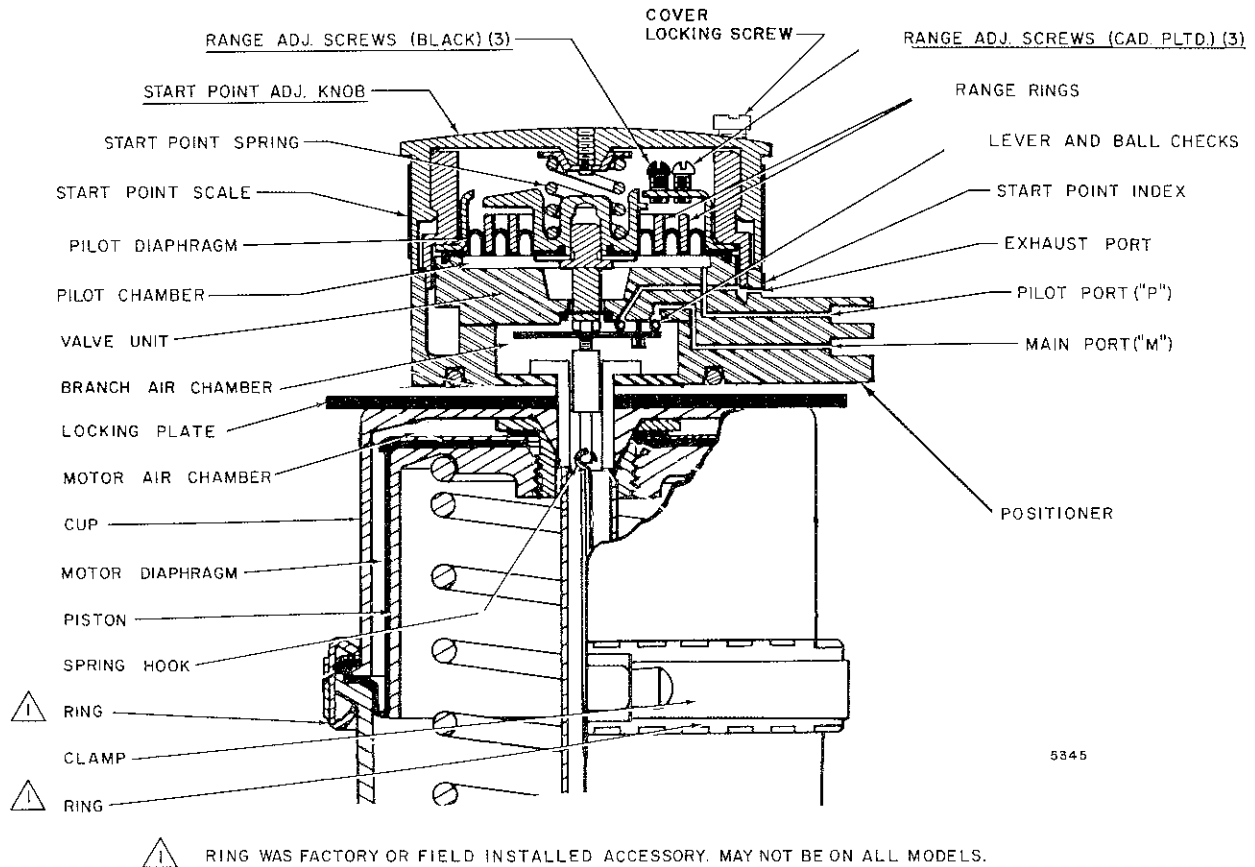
Partial Cutaway Showing Old Style Positive Positioner Adjustment Locations.
